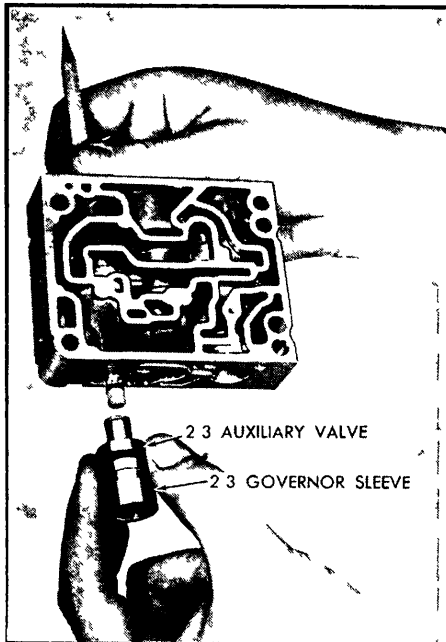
Removing 2-3 governor sleeve and auxiliary valve. 1952
